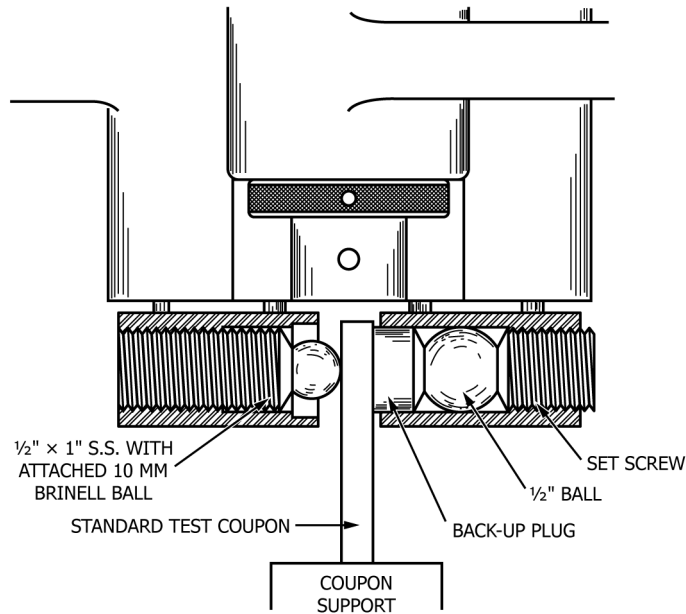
Schematic Drawing of Calibration Accessories for Falex Pin and Vee Block Lubricant Test Machine
